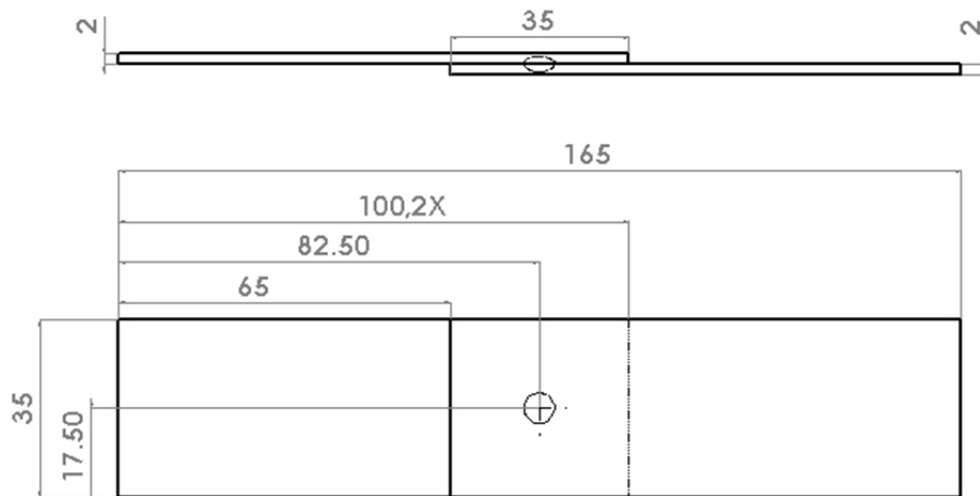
Geometry of Al 6061-T6 resistance spot weld lap-shear coupon.
